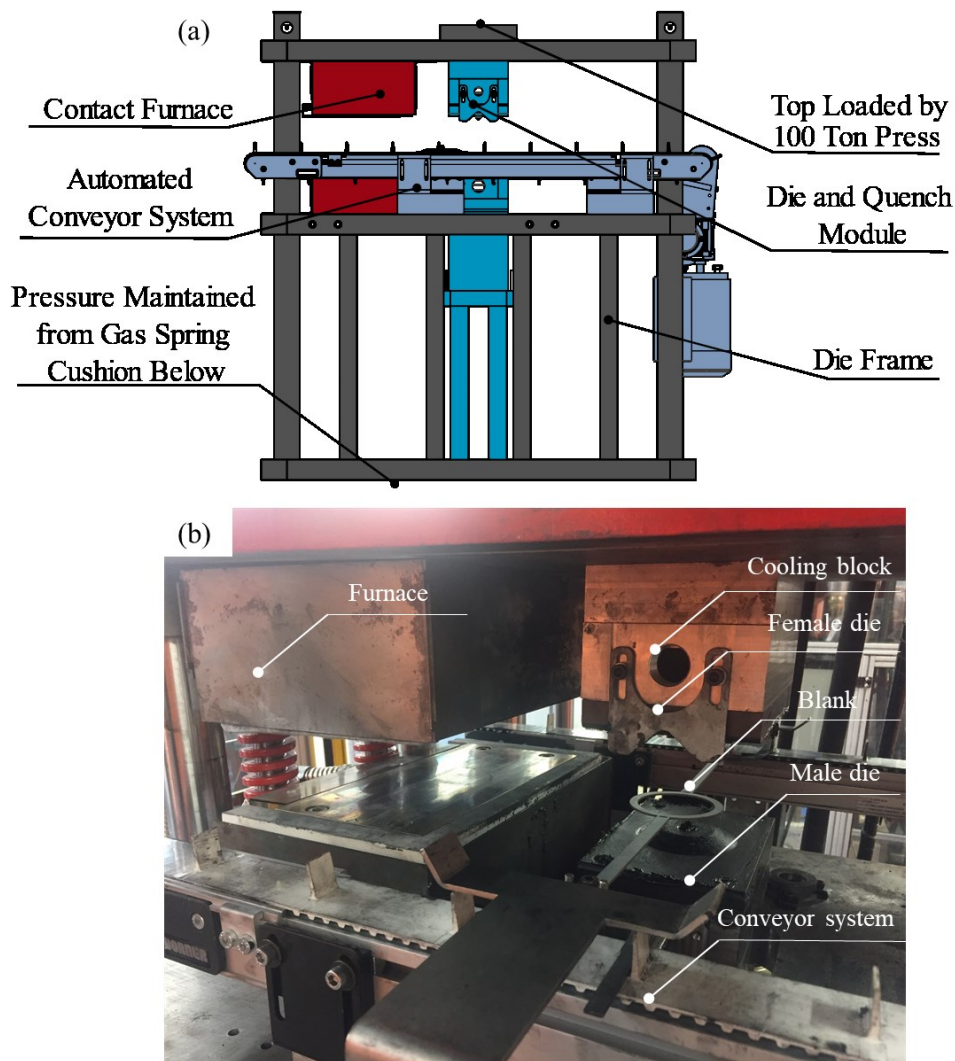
A diagram of *Uni-form* with tool set for the FWS disc springs (a) tool assembly in CAD (b) tool assembly.
